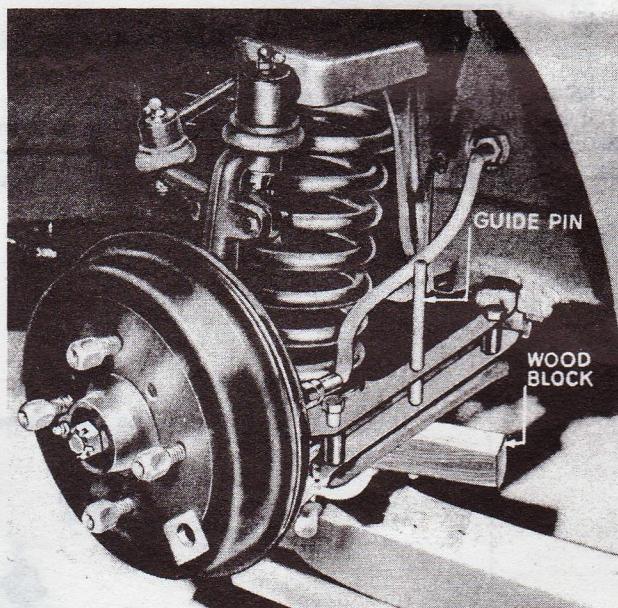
Method of supporting spring pan whilst removing four outer securing bolts
